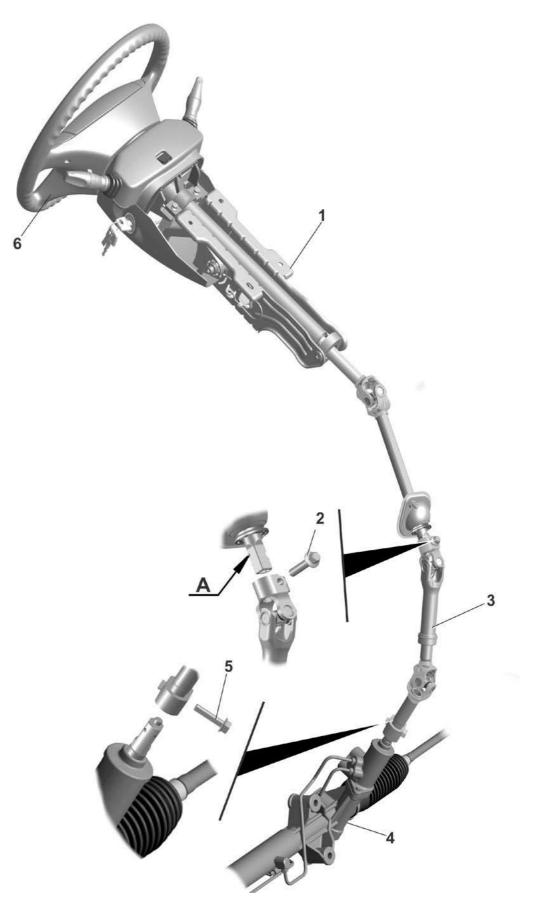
Steering cardan shaft installation: 1 – steering column; 2, 5 – bolts; 3 – cardan shaft; 4 – steering gear; 6 – steering wheel
